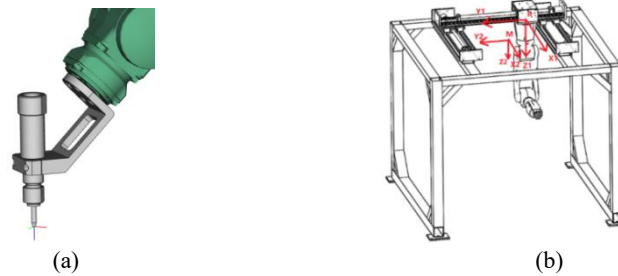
(a) Combination of robot hand-holding water jet cutting head (b) Schematic diagram of robot body inversion
